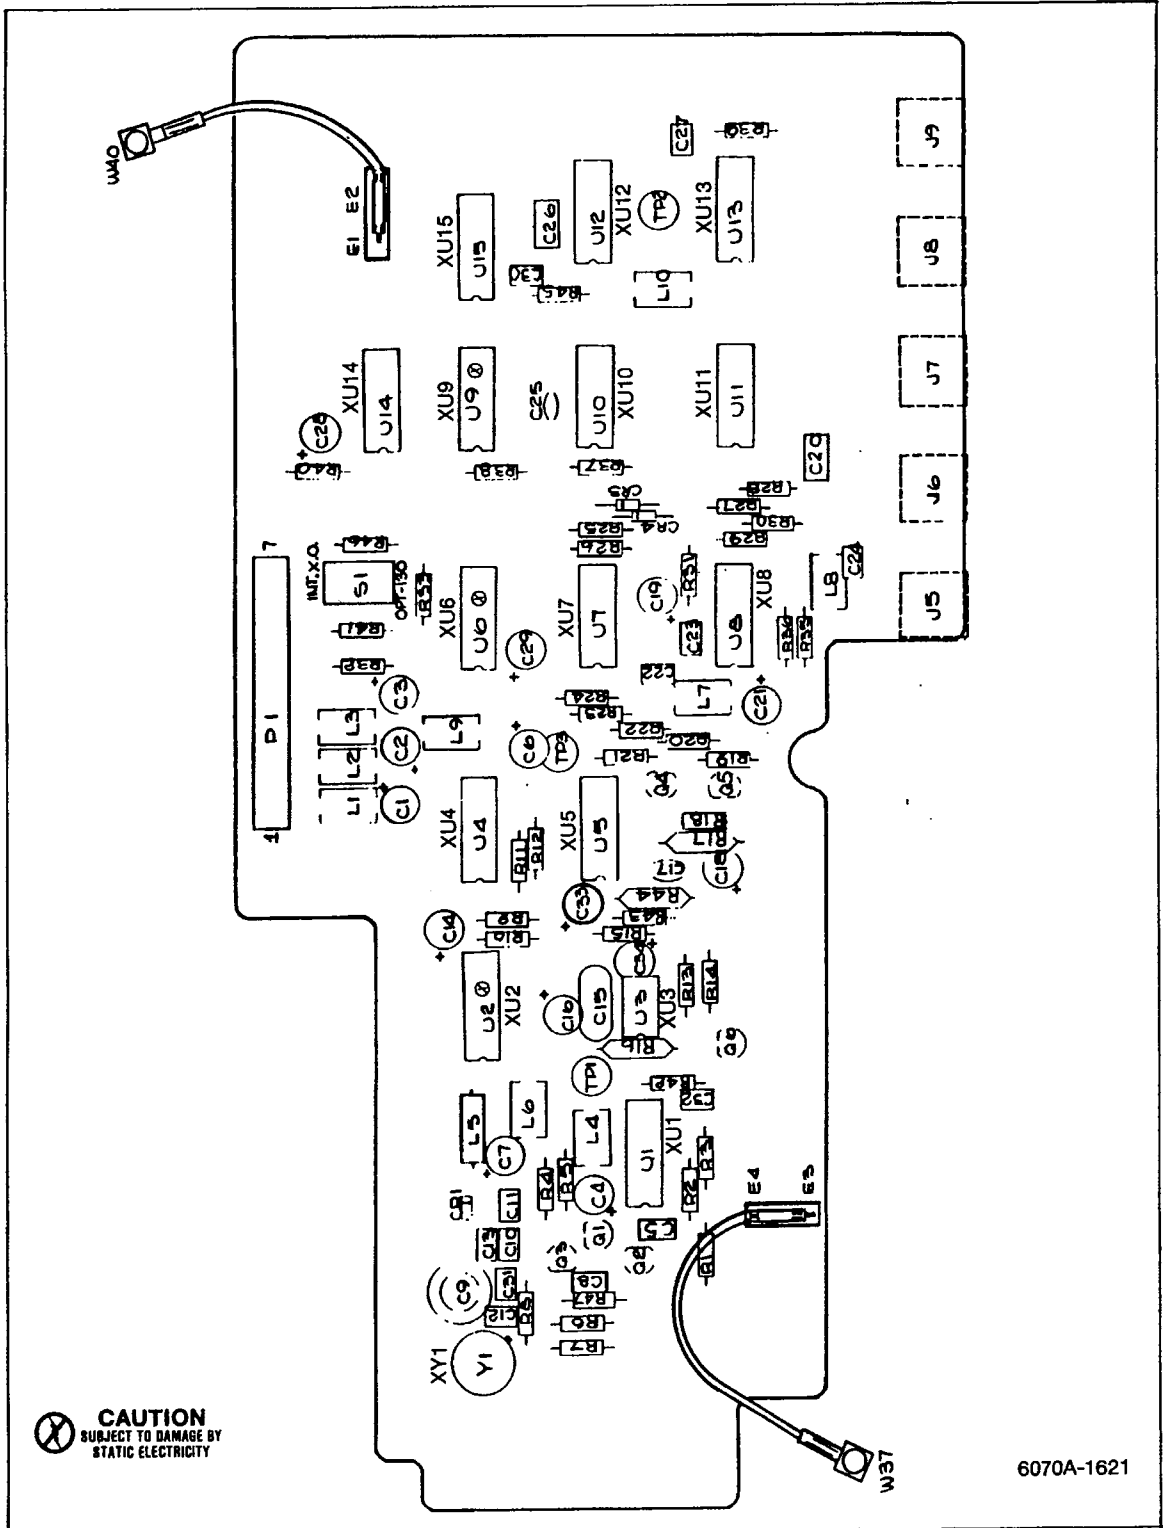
A3A2 10 MHz Reference PCB Assembly
